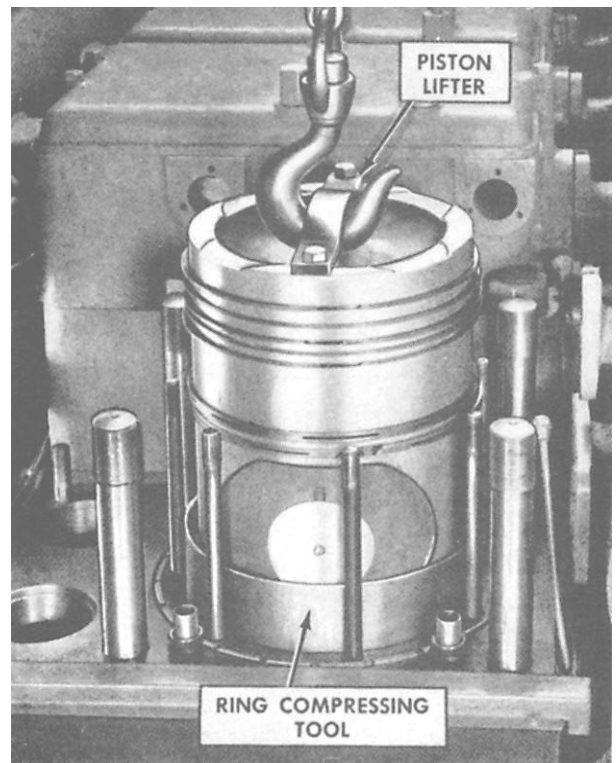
Installing a piston in a cylinder bore with a funnel-type ring compressor.
